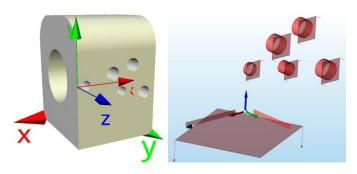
Measured side of the workpiece: (a) CAD model with *a reference frame* (front) and *workpiece datum* (back); (b) *Measured cylinders* with the *workpiece datum*.
